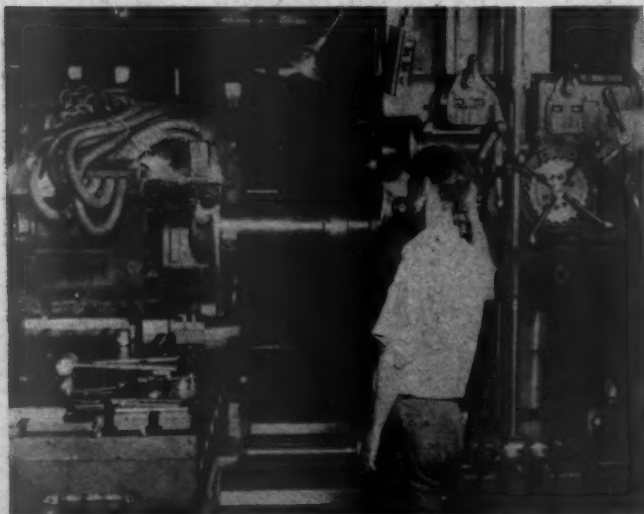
Facing the journal bearing with a Davis stub boring bar and block type cutter
